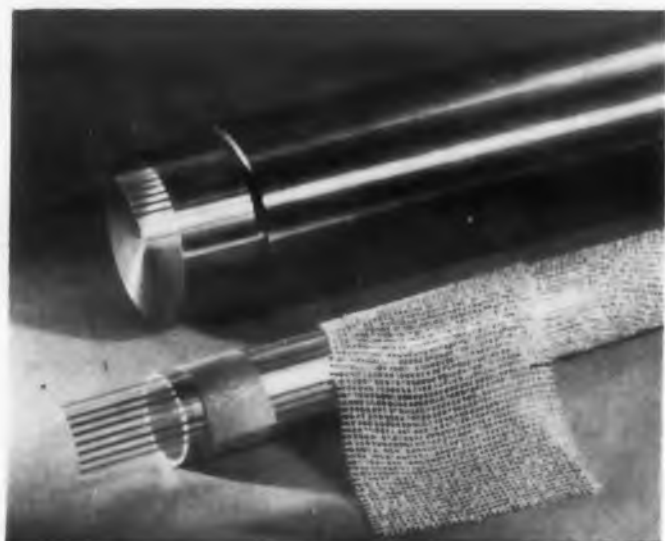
Simple heat forming tools used for making a curved cross-section.
